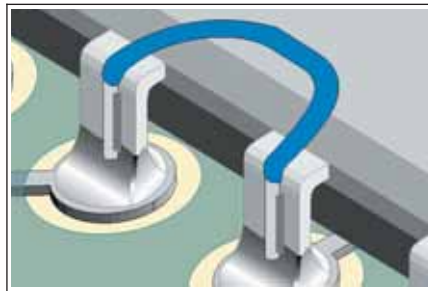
Acceptable Wire looped and soldered to adjacent component leads.
